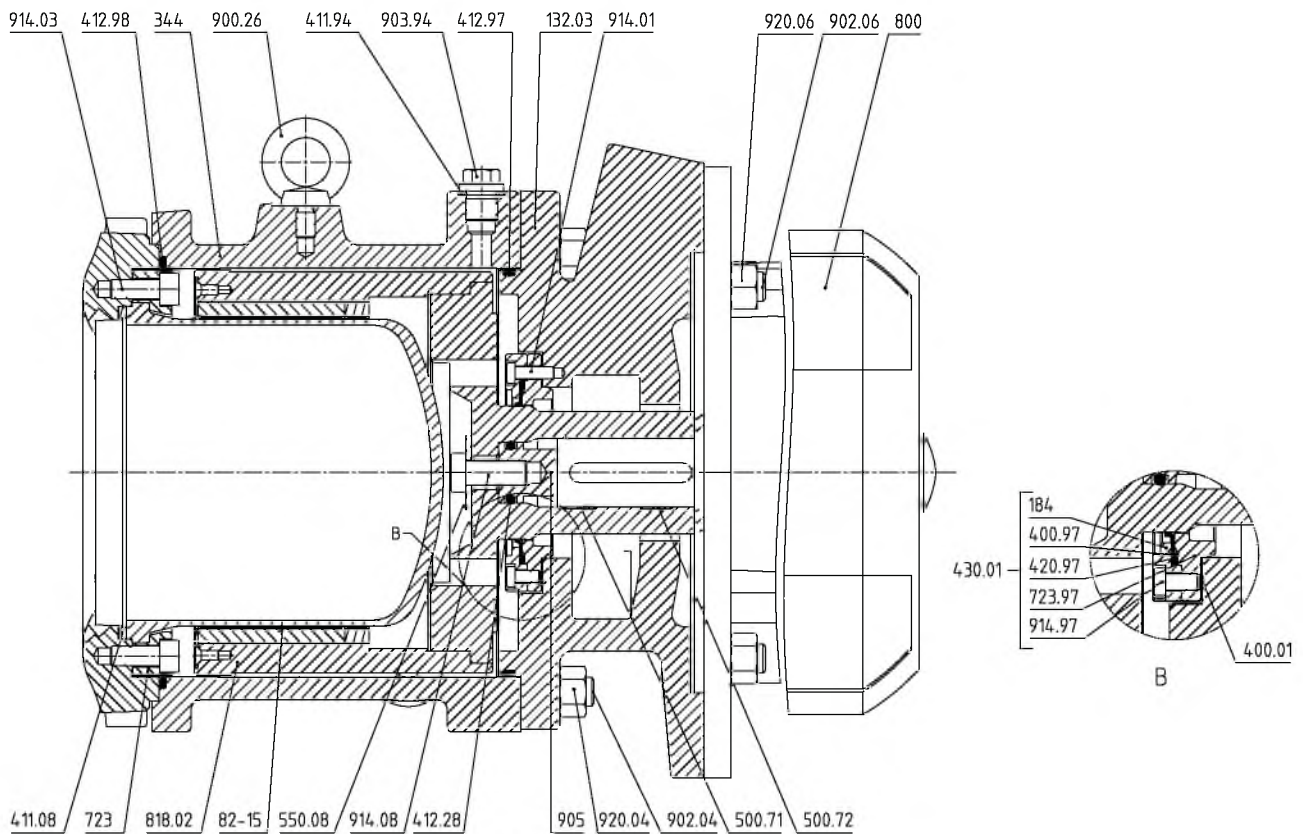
Model with ceramic containment shroud and leakage barrier with shaft seal ring
